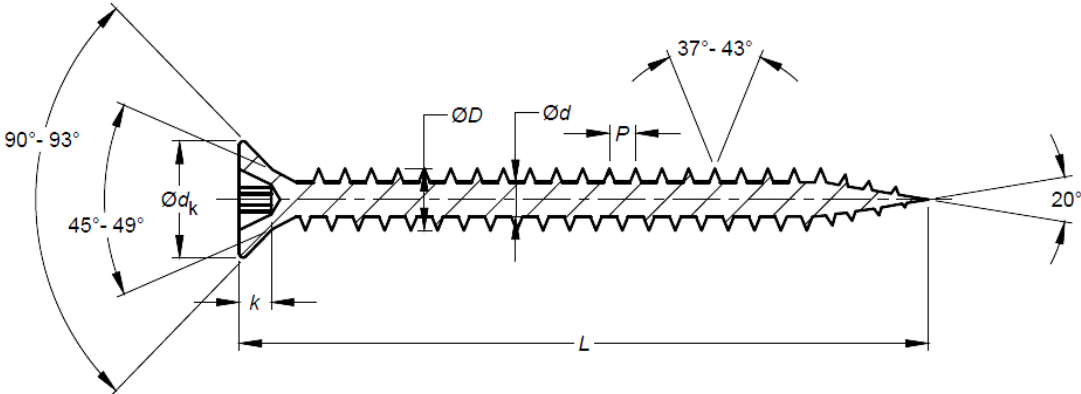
(a) FULLY THREADED CHIPBOARD SCREWS
